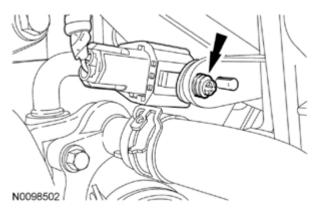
Locating Knock Sensor (KS) Electrical Connector Of Intake Manifold Courtesy of FORD MOTOR CO.
